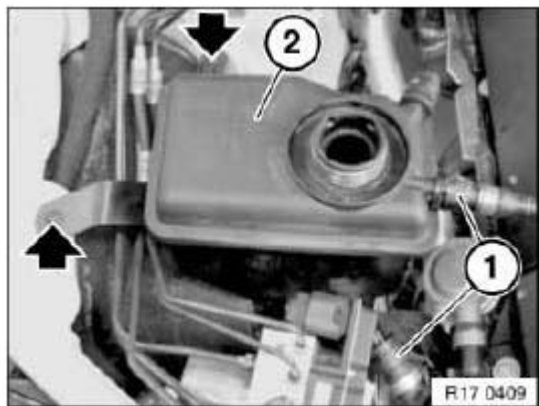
Identifying Coolant Hoses And Coolant Expansion Tank
